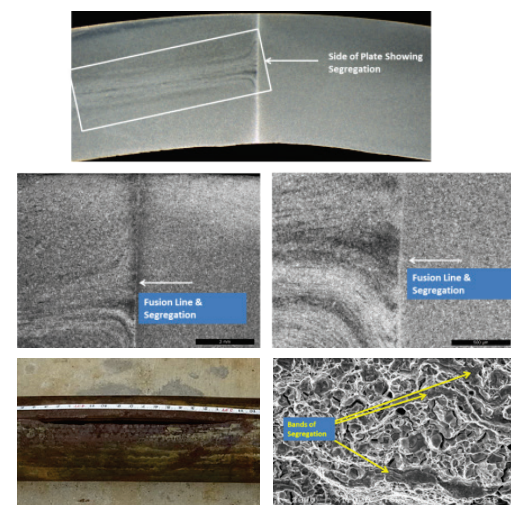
P110 ERW Fusion Line Brittle Fracture Failure
